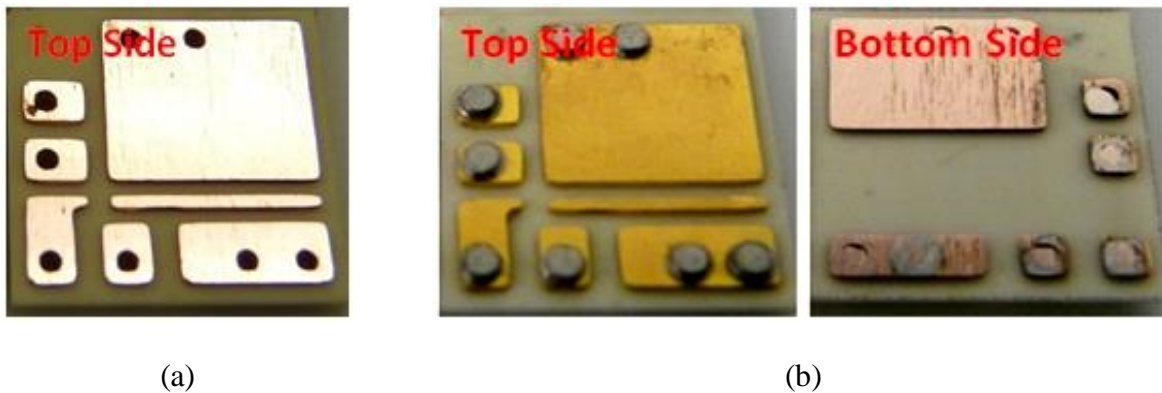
Patterned Al_2O_3 – DBC substrate: (a) top surface pads after etching and laser drilling, (b) electro-plated Au top surface with soldered pins and ground bottom surface
